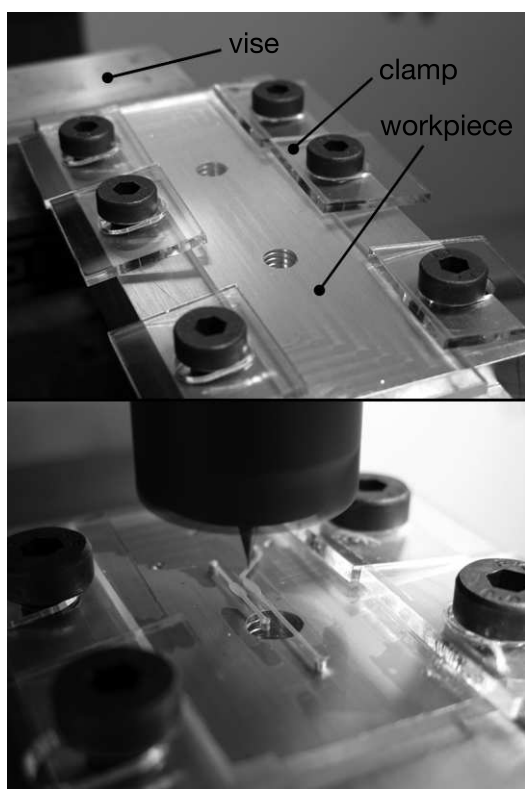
An aluminum fixture allows repeatable positioning and acrylic clamps tightly grip workpiece (above). A 125 μm diameter endmill pockets a PCR device in less than 5 min (below).
